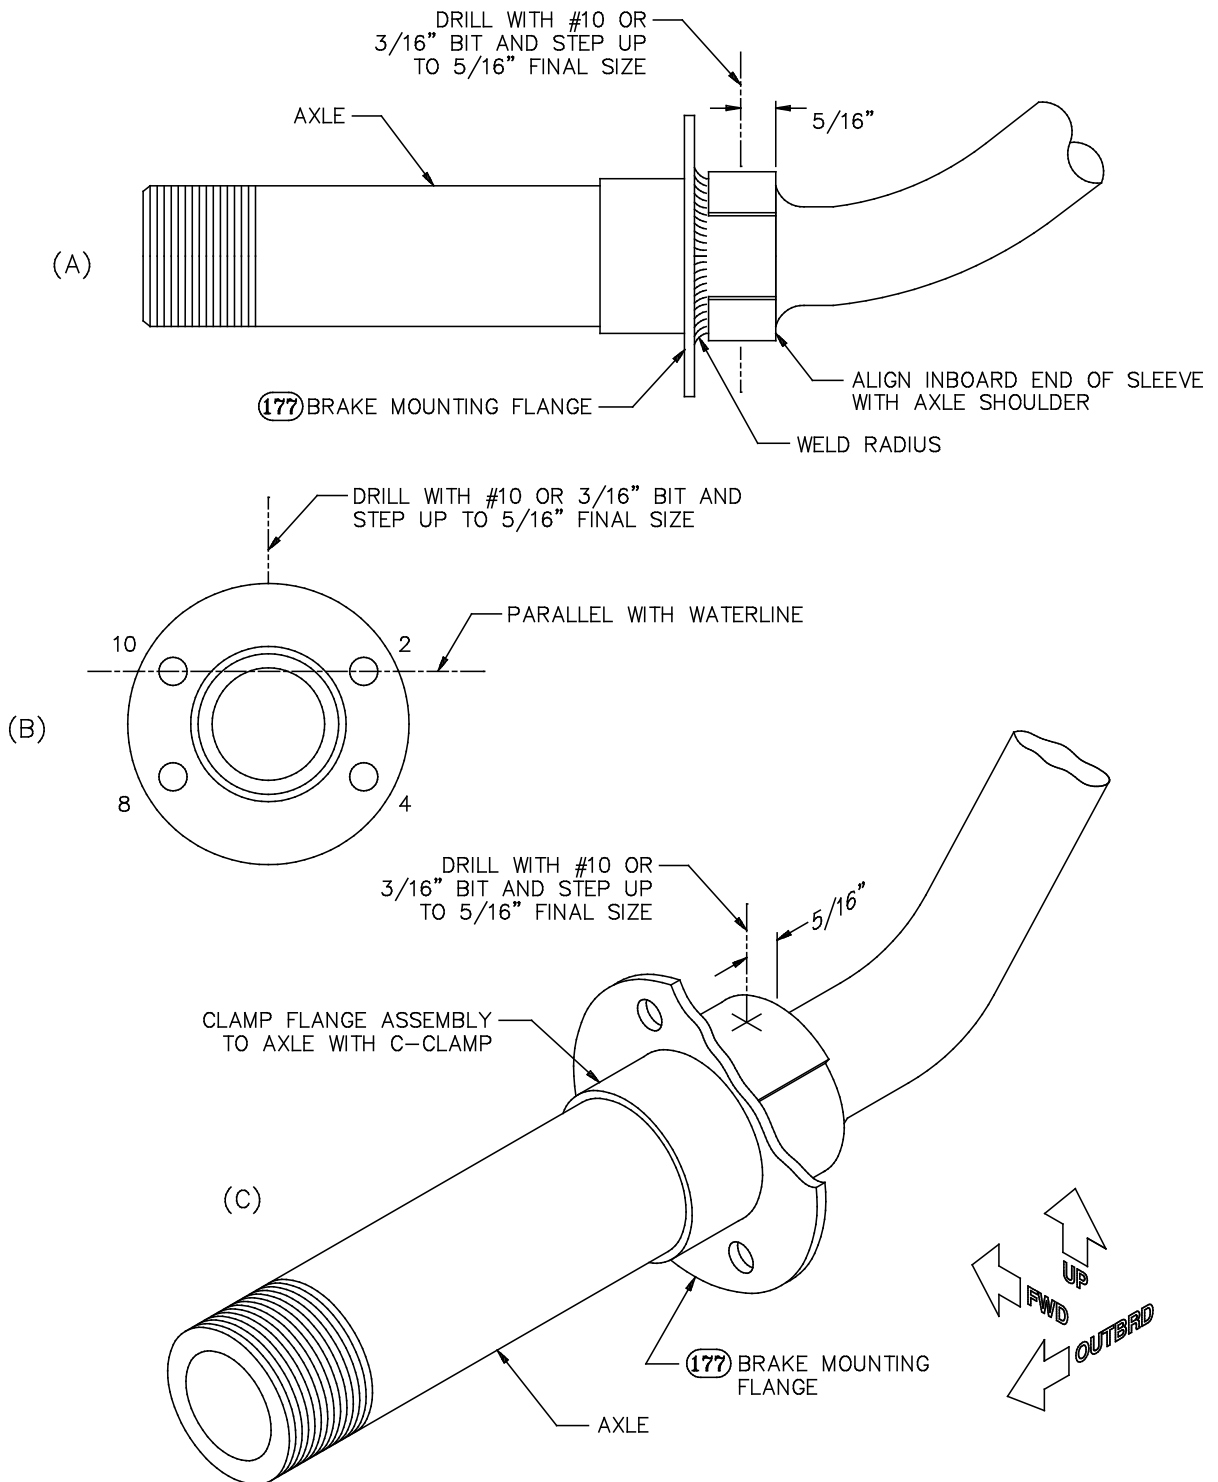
Drilling the Brake Mounting Flange/Axle Bolt Hole
